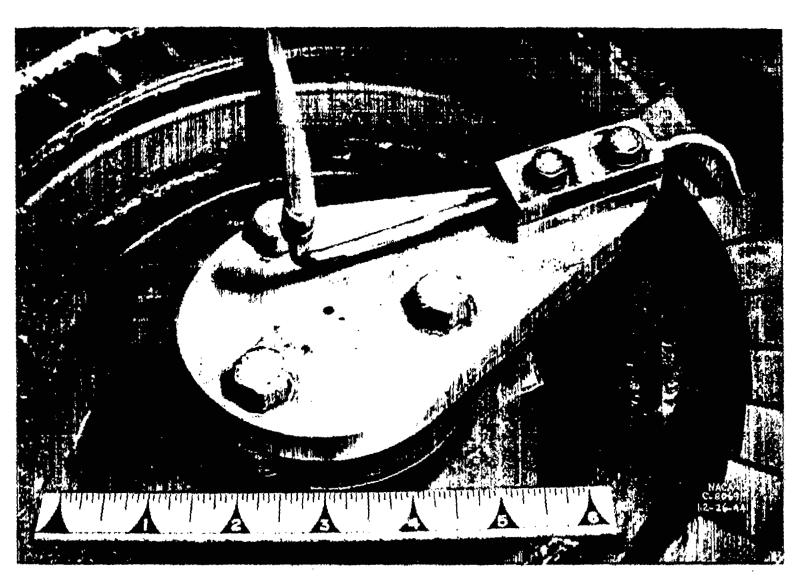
Discharge total-head tube mounted on nozzie box A.
